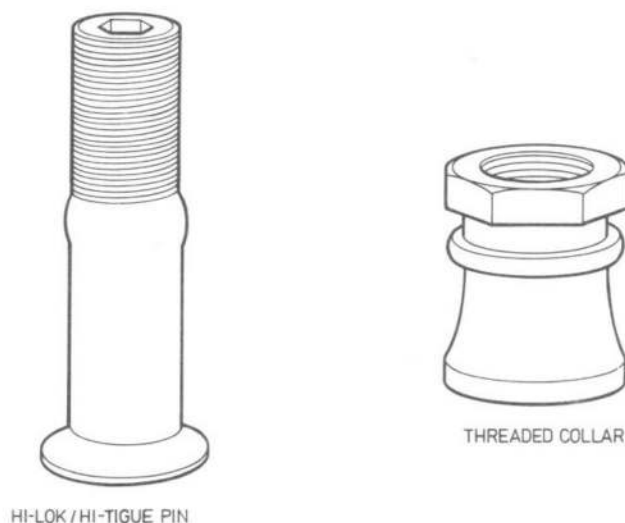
Hi-Lok/Hi-Tigue pin and threaded collar
